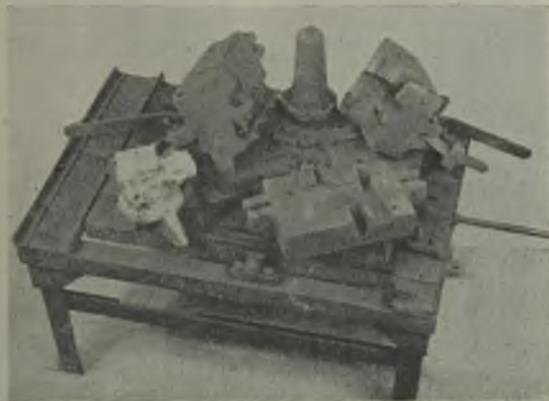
CONSTRUCTION OF "BOOST CONTROL" CASING DIE.
